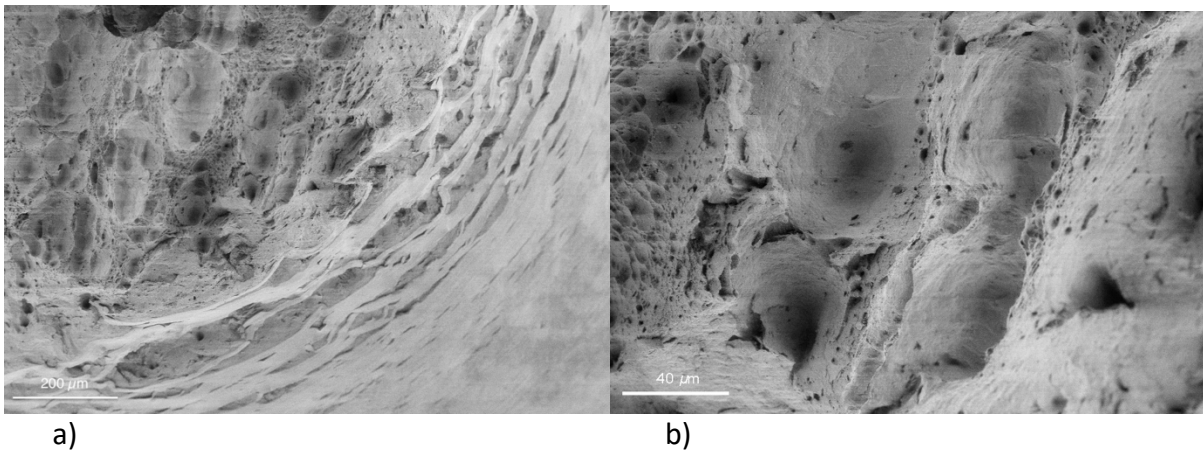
High magnification view of the fracture surface for 316L-eGaln tested at 35°C and  $8.33 \times 10^{-7} \text{ m.s}^{-1}$ .
